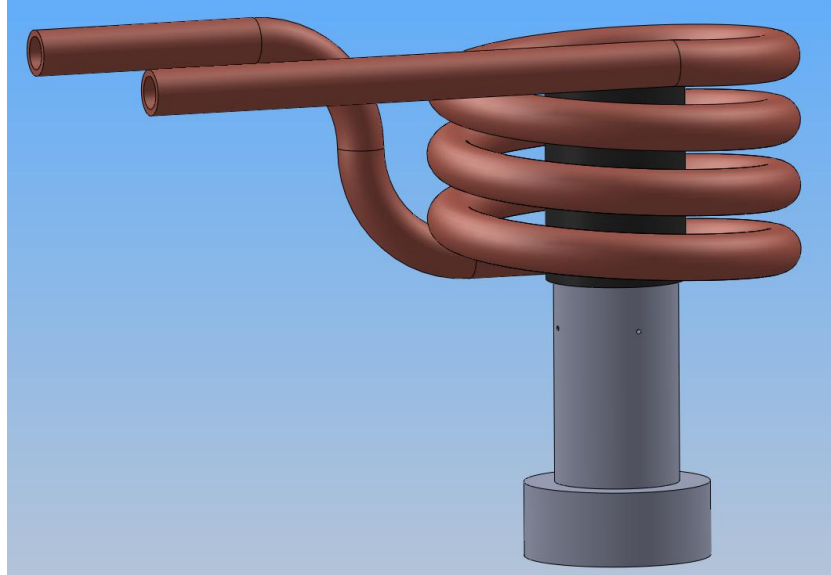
Solid model assembly of the induction heater copper coil, graphite workpiece, and HEMJ thimble
